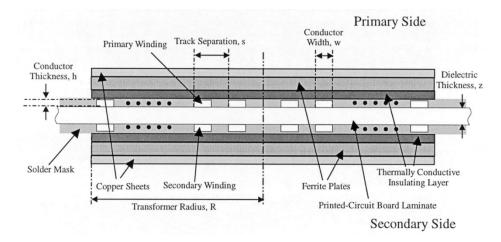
Proposed cross-sectional structure of a PCB transformer shielded with ferrite plates and copper sheets.
